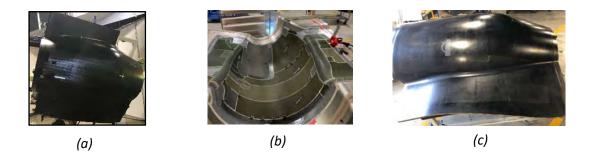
Fan Duct Inner Surface Liner Manufacturing: (a) Skin Perforation, (b) Bond Panel Assembly, (c) Final Acoustic Panel.
